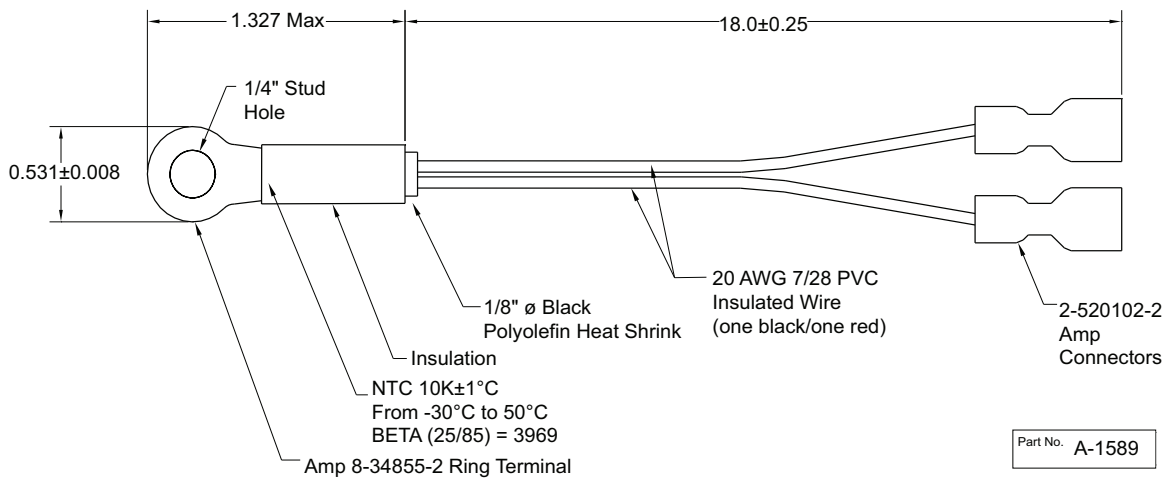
HH79NZ039 Dry Bulb and Mixed Air Sensor Wiring
